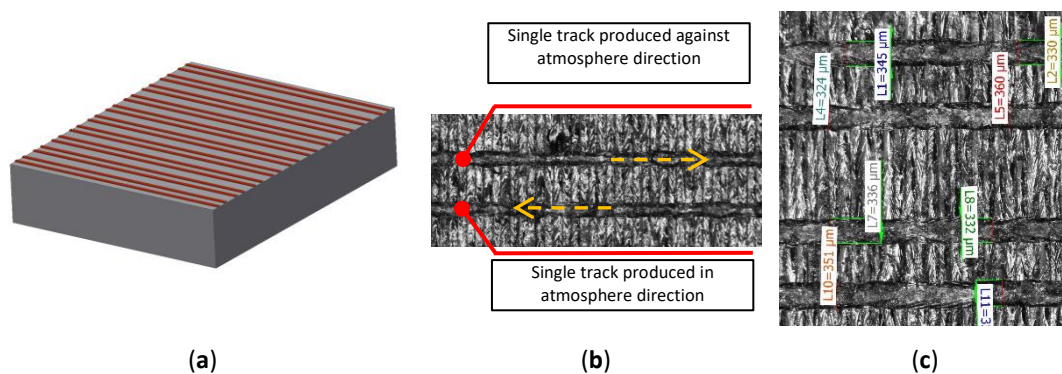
(a) Shape of the single-track weld specimen; (b) measurement of the width of the single welds; (c) One combination of process parameters produced in and against atmosphere flow
